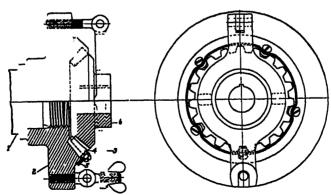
FIXTURE FOR HOLDING A BEVEL PINION FOR INTERNAL GRINDING
